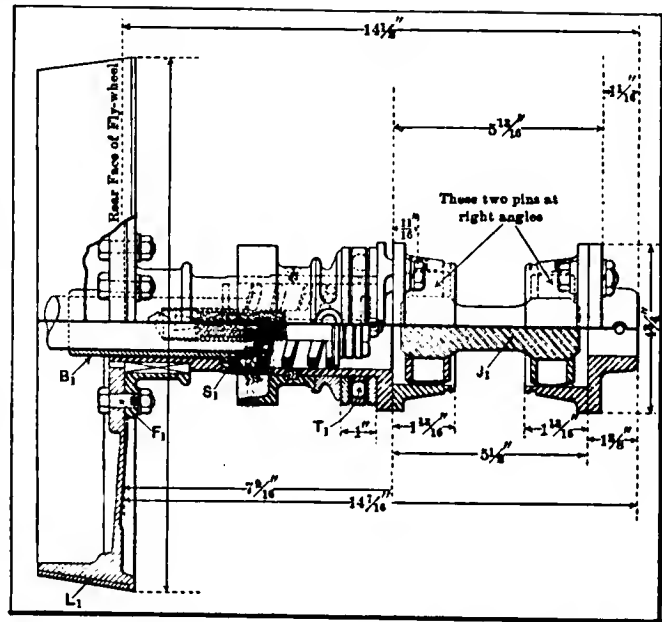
Section of clutch, of the cone type, with square spring, leather facing, and ball thrust bearings
